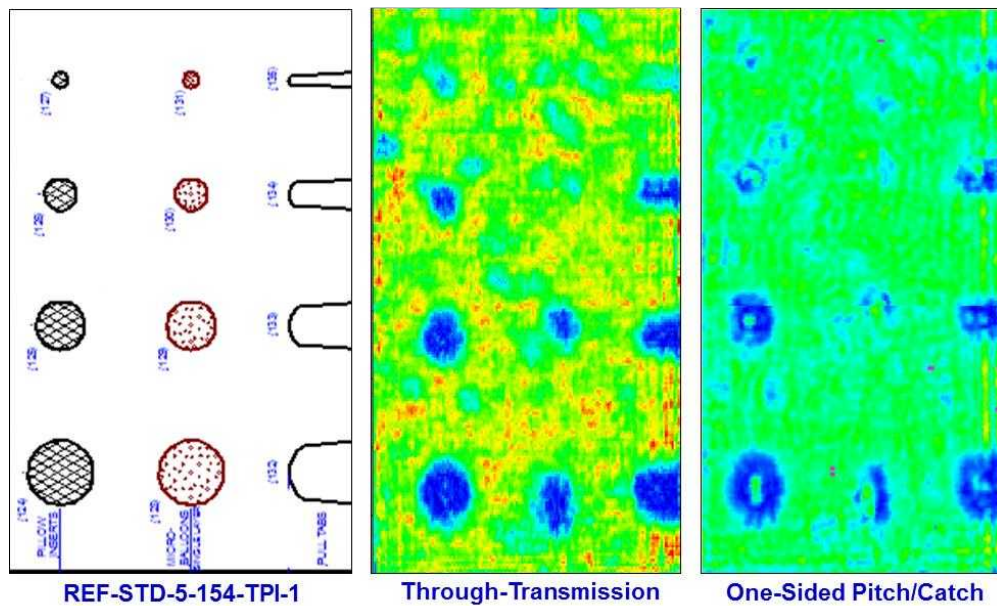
Air Coupled UT C-scan Comparison Between TTU and One-Sided Pitch/Catch Setup on Blade Bond Joint Test Specimen REF-STD-5-154-TPI-1.
